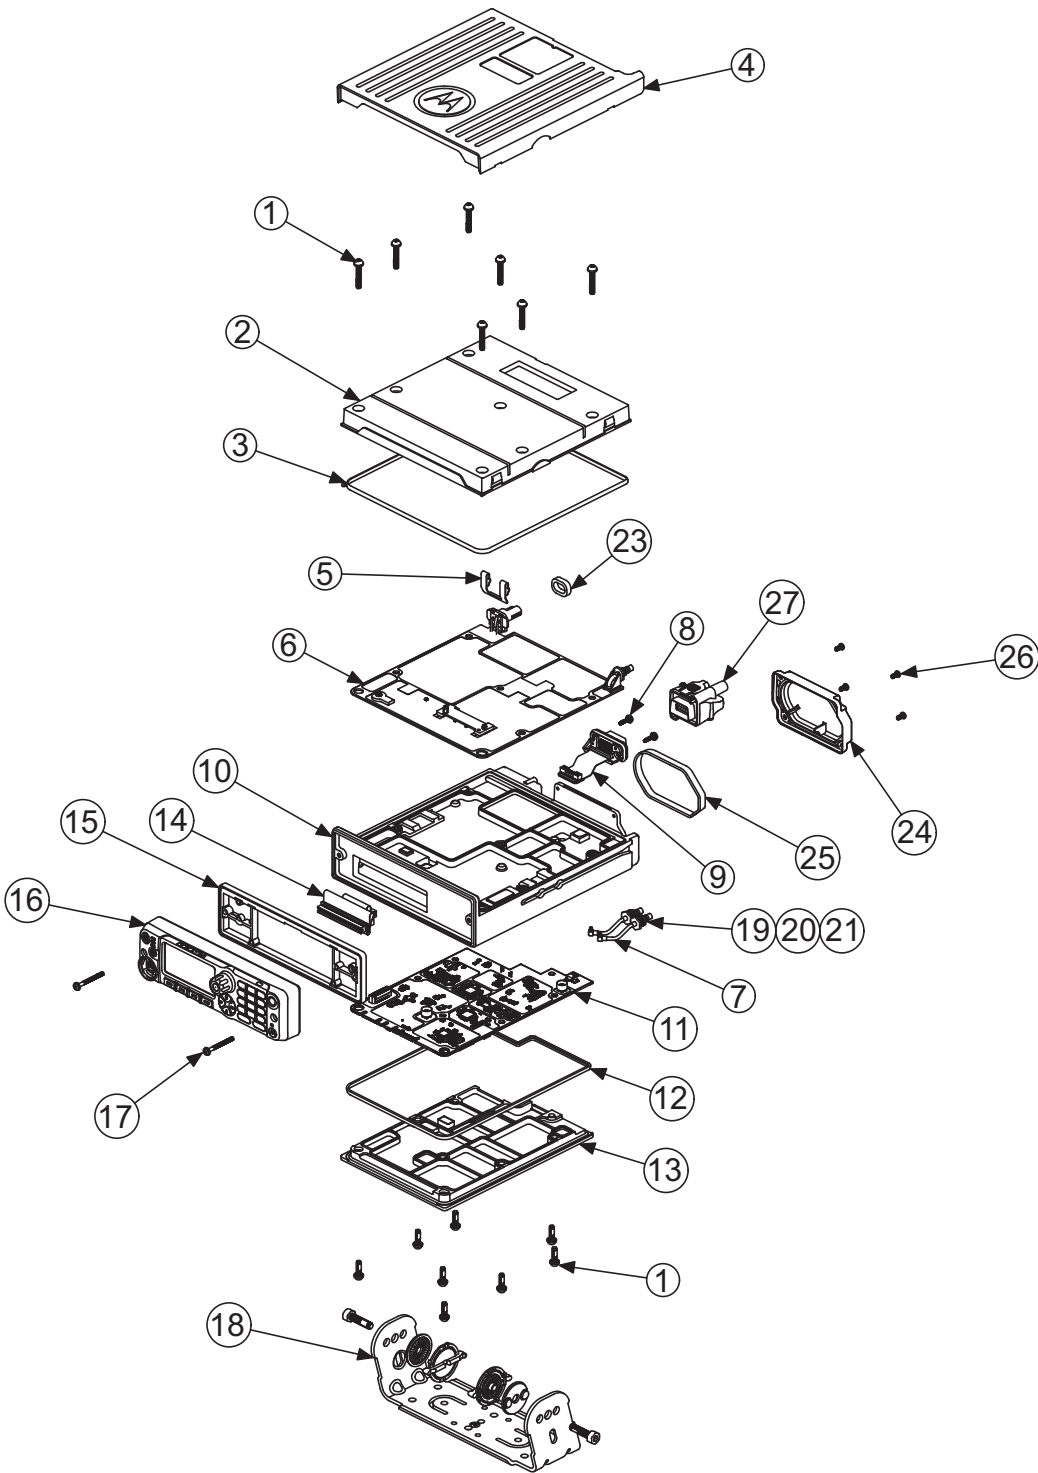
APX 8500 O7 Dash Mount Radio Exploded View
